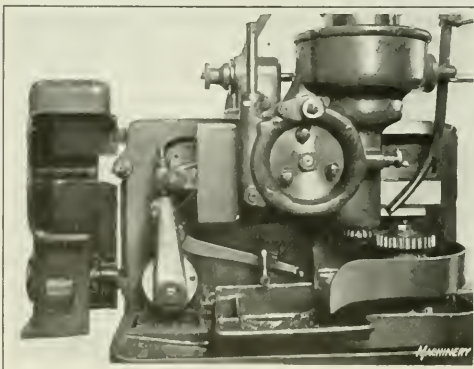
Close-up View of Mechanism which imparts Reciprocating Movements to the Cutter-spindle
